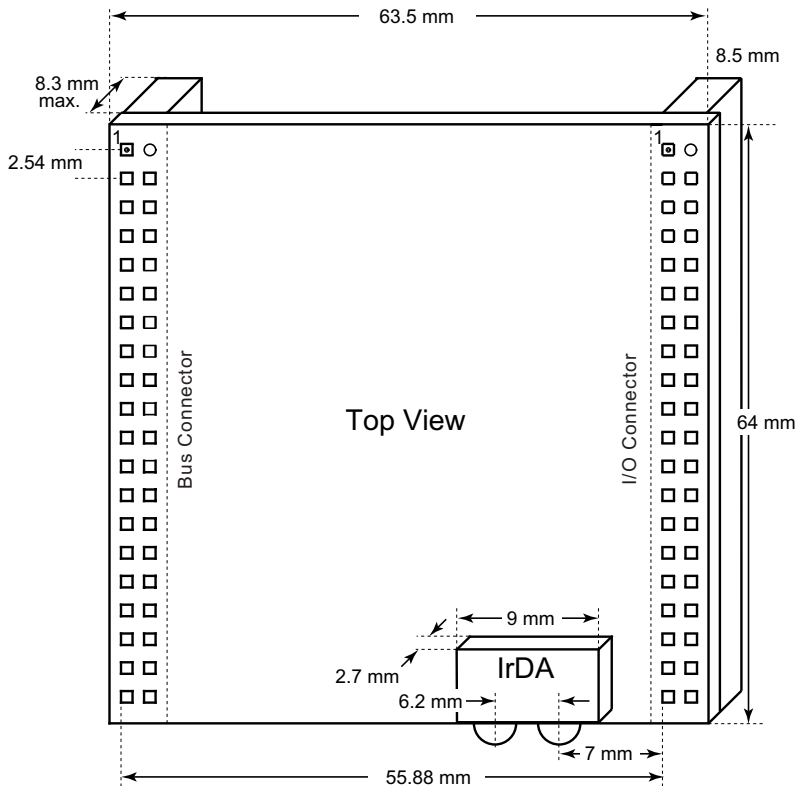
Physical Dimensions of the eZ80F92 Flash Module
